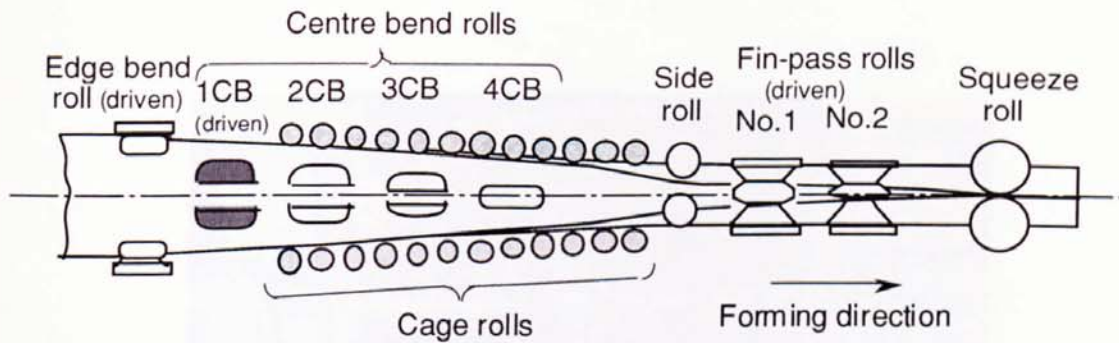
Schematic layout of the CBR forming pilot mill used in strain measurements
